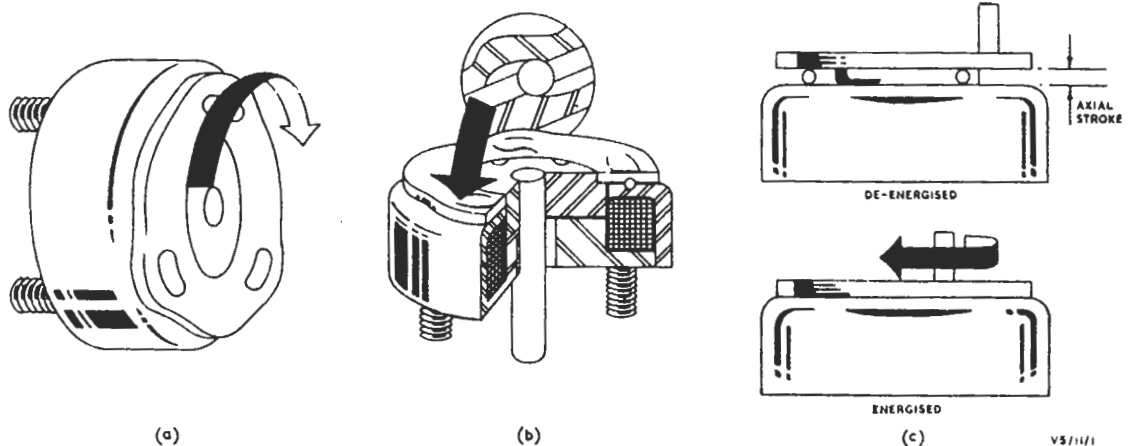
Ledex Mechanism (a) General View (b) Sectional View (c) Action
